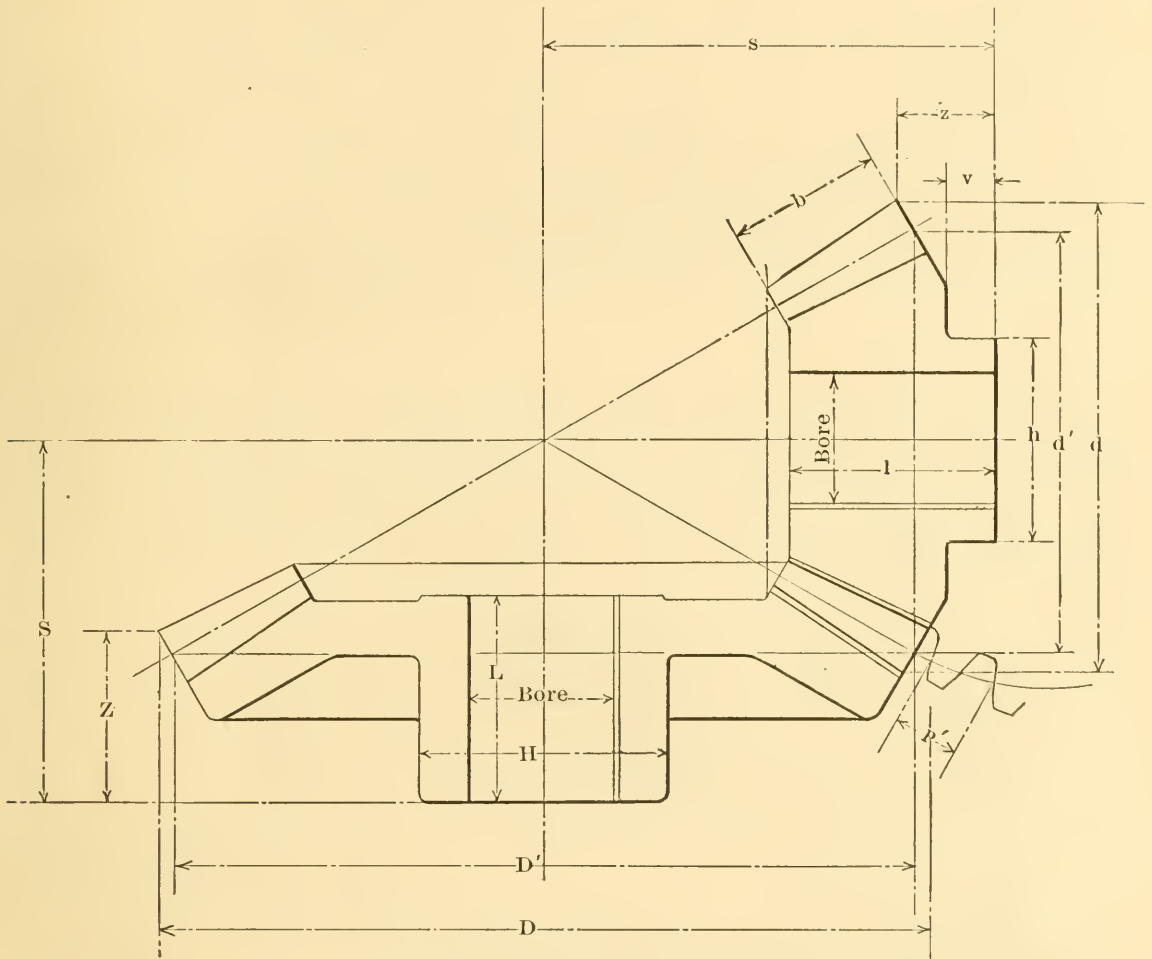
NECESSARY DIMENSIONS TO COMPLETELY DESCRIBE A PAIR OF BEVEL GEARS.
